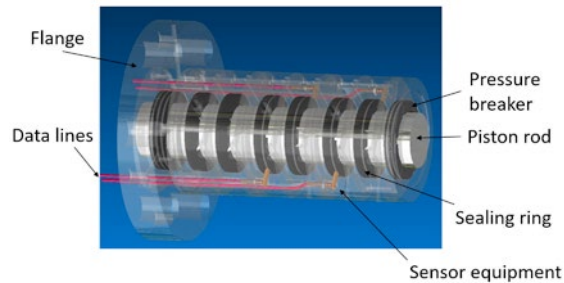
Piston rod packing with one sensor at each sealing ring (4 sealing rings in total)
